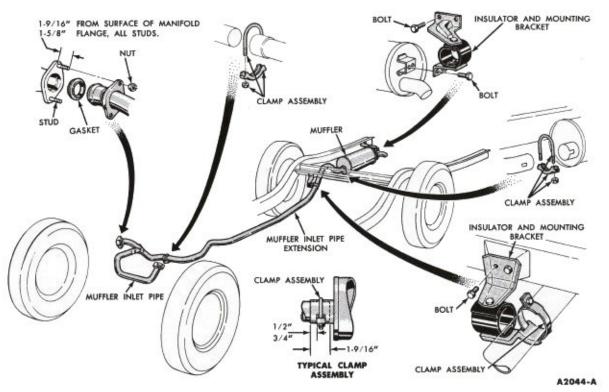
Falcon and Comet V-8 Exhaust System—Station Wagons
